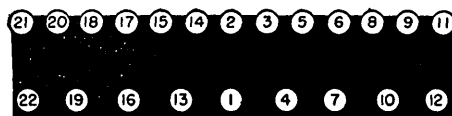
Cylinder head bolt tightening sequence, 1935-52
